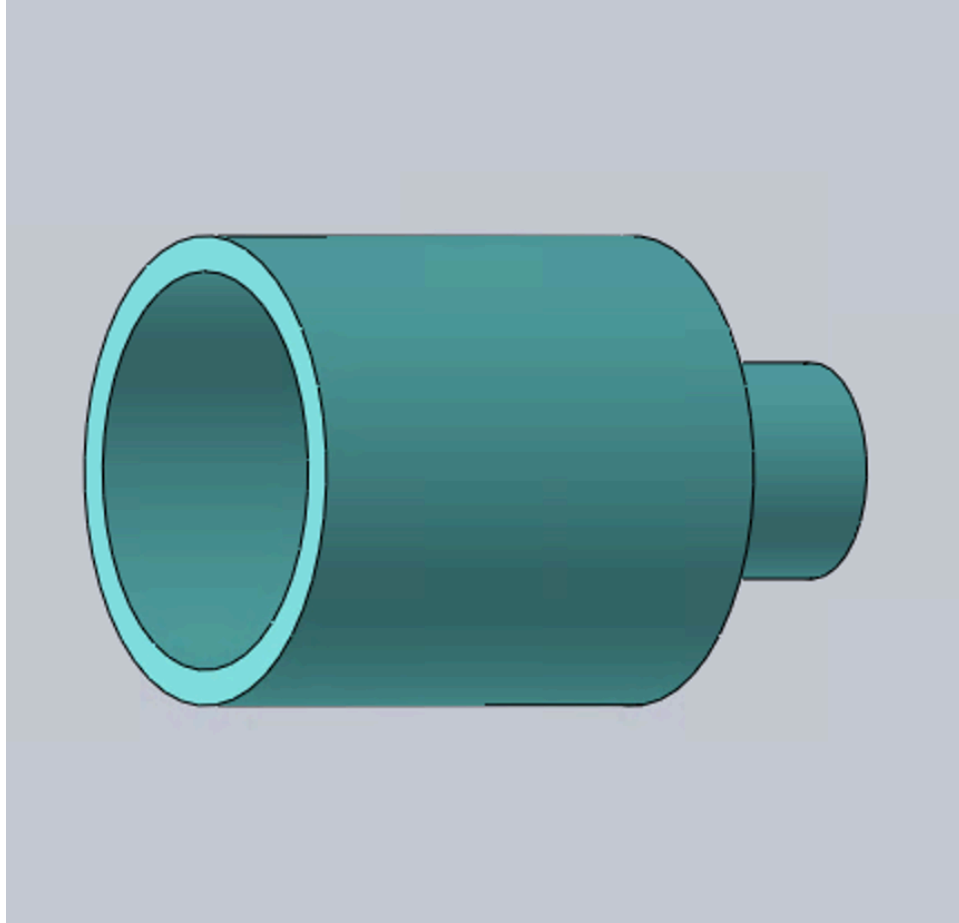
End cap supports in trimetric view rotated 90 degrees counterclockwise
